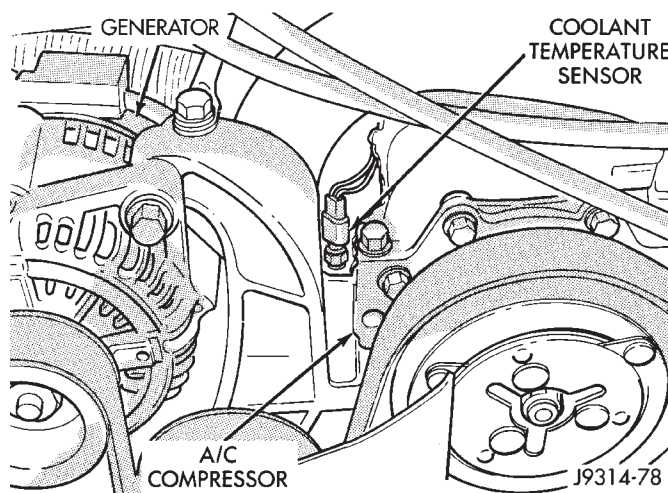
Engine Coolant Temperature Sensor—5.2L Engines—Typical
